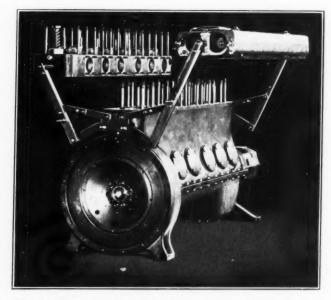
Heavy parts of this diesel are easily removable by one man and can be held suspended in a jig
